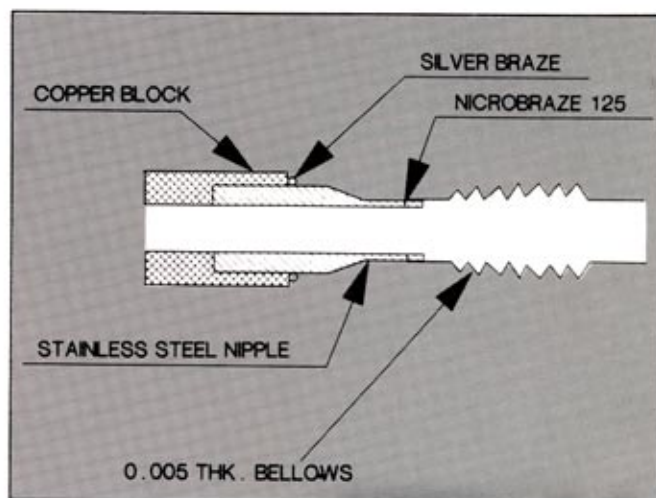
Diagram of electronic test fixture assembly which is produced by vacuum furnace brazing.
